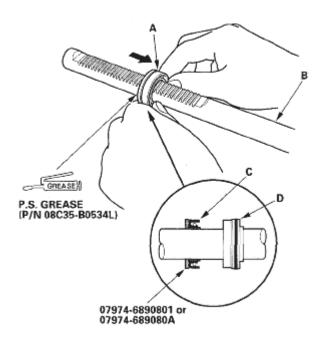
Installing Cylinder End Seal Onto Steering Rack Courtesy of AMERICAN HONDA MOTOR CO., INC.
